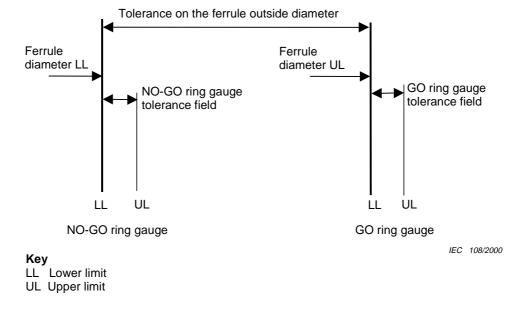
Ring gauging tolerance field of ferrule outside diameter
